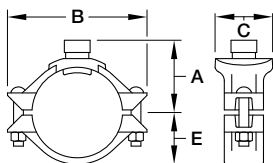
MECHANICAL CROSS THREADED OUTLET
